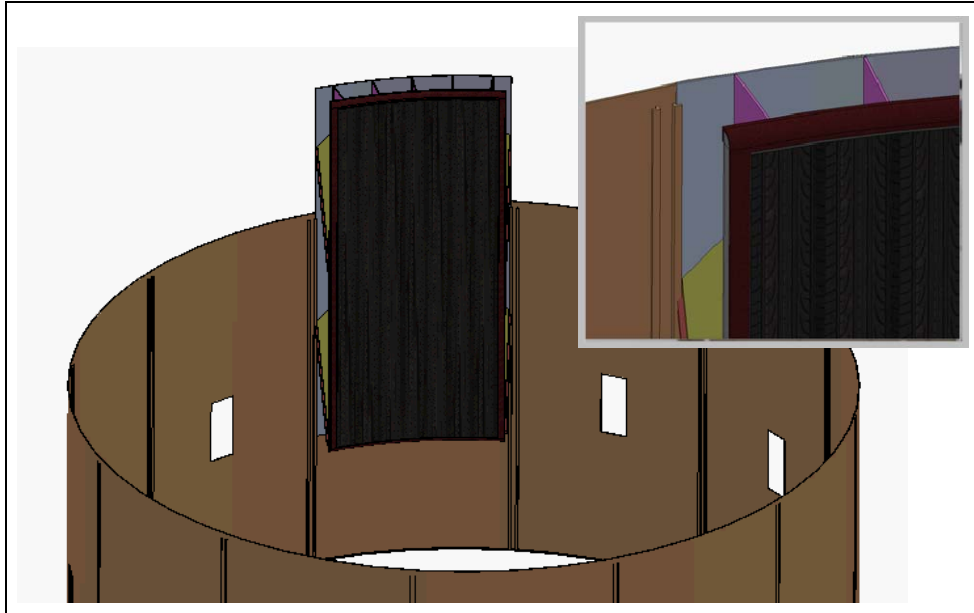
Removal of Wedge and Pad Assembly from 10m Gripper –
